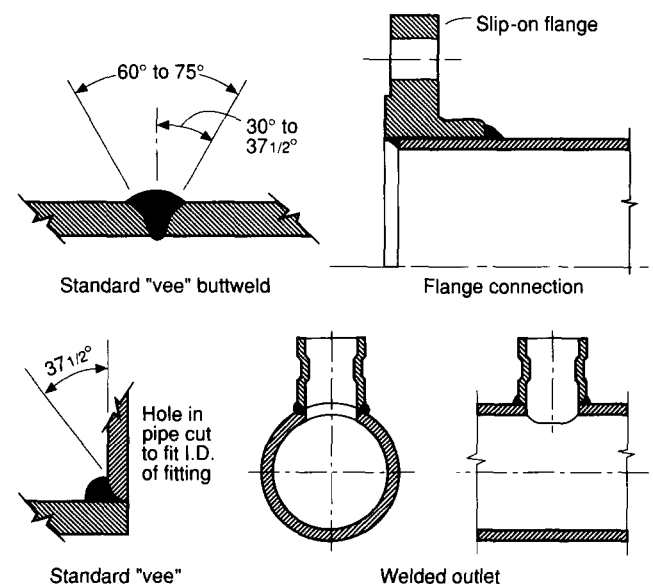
(a) Acceptable weld joints.
